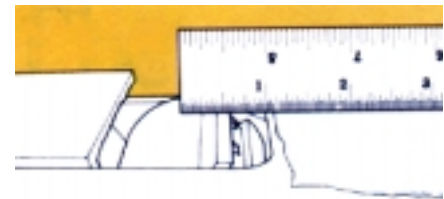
Using a straightedge over a piece of waxed paper as a guide, lower the infeed table until it is level with the bevel of the cutting edge.
